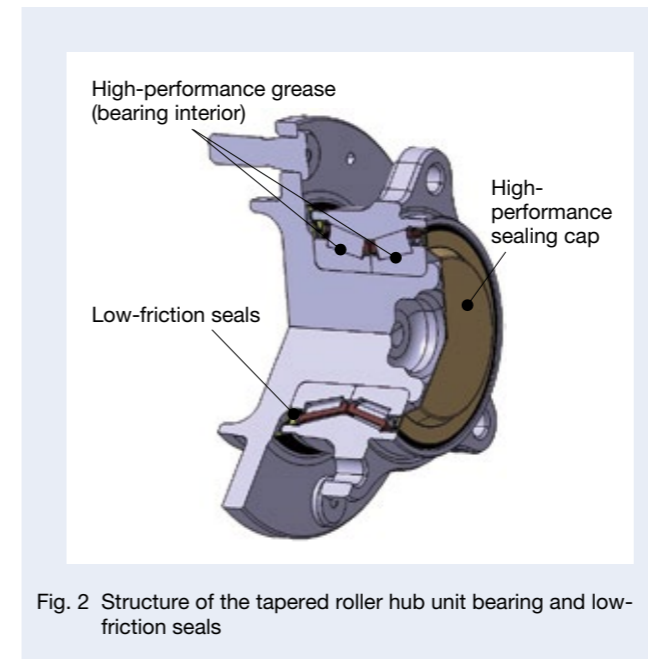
Structure of the tapered roller hub unit bearing and low-friction seals
